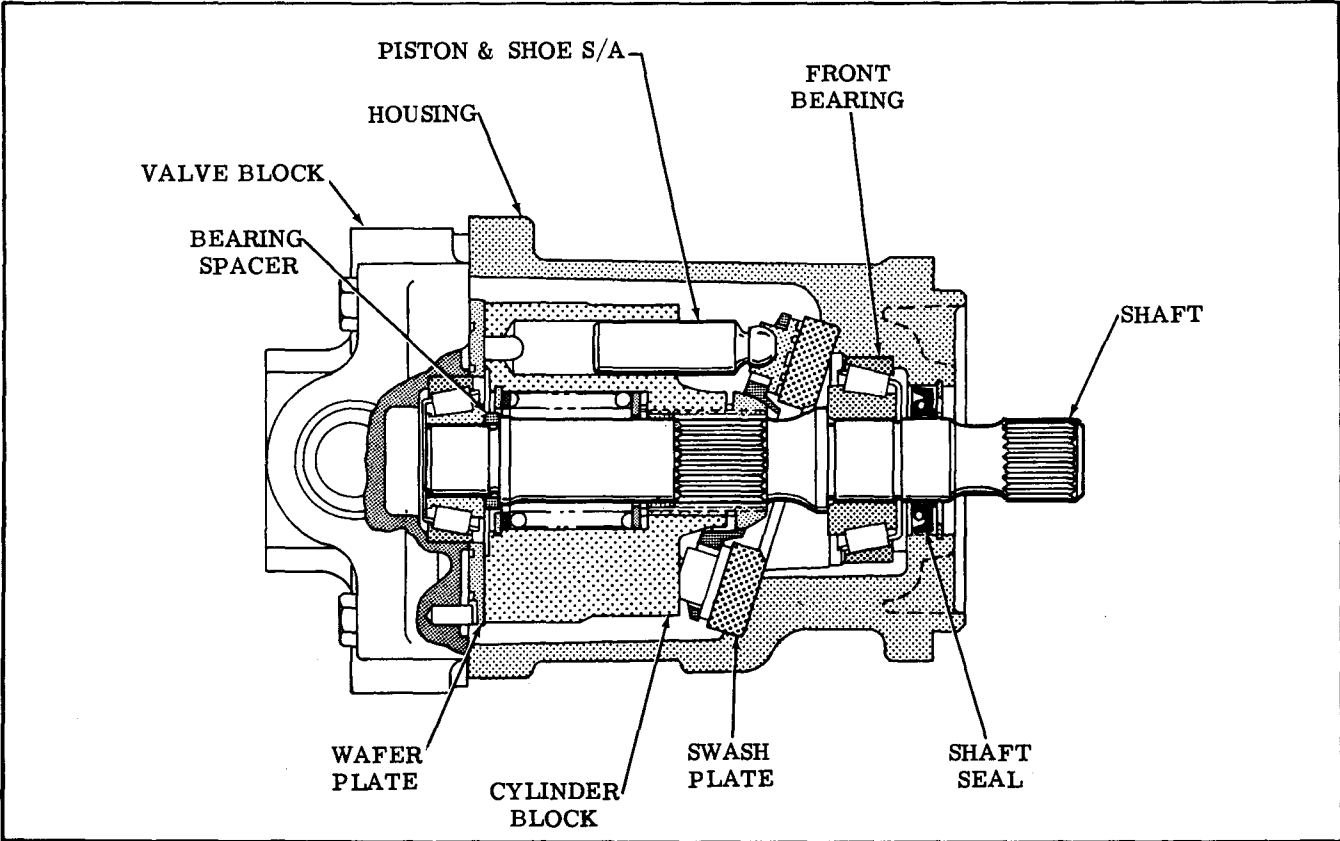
SECTIONAL VIEW OF INLINE PISTON MOTOR.
